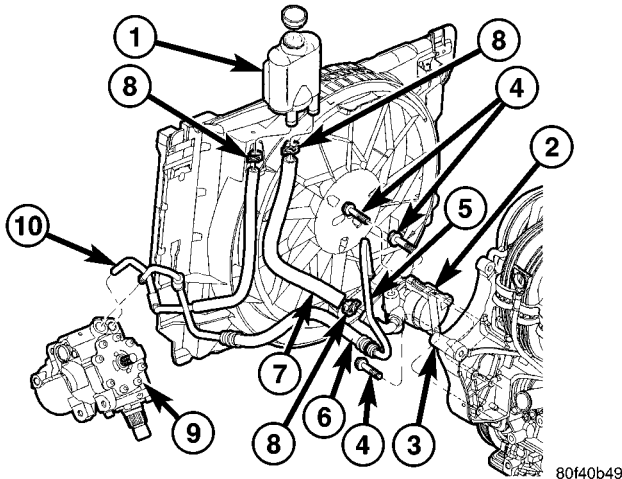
POWER STEERING GEAR & PUMP - 2.4L
